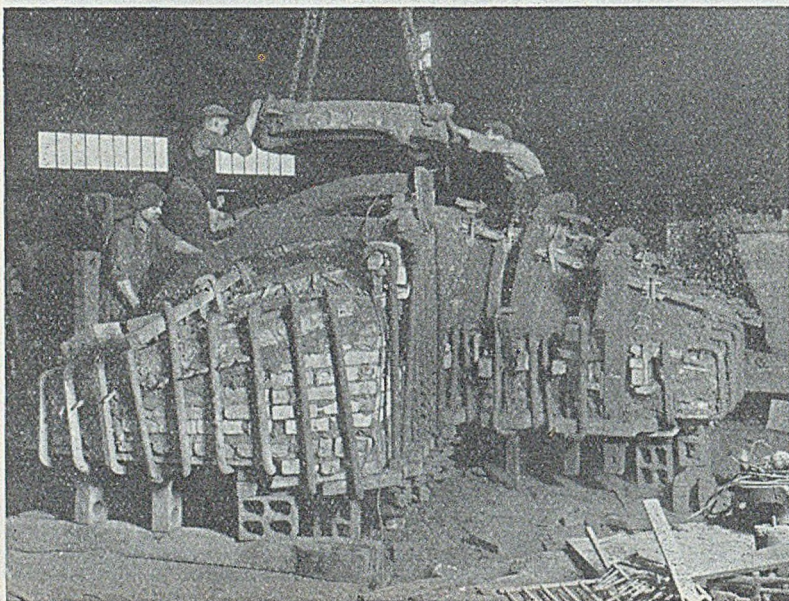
Final Closing Operation on a 20-ton Propeller Mould. Note the Heavy Reinforcing Irons and Tie-bars.
